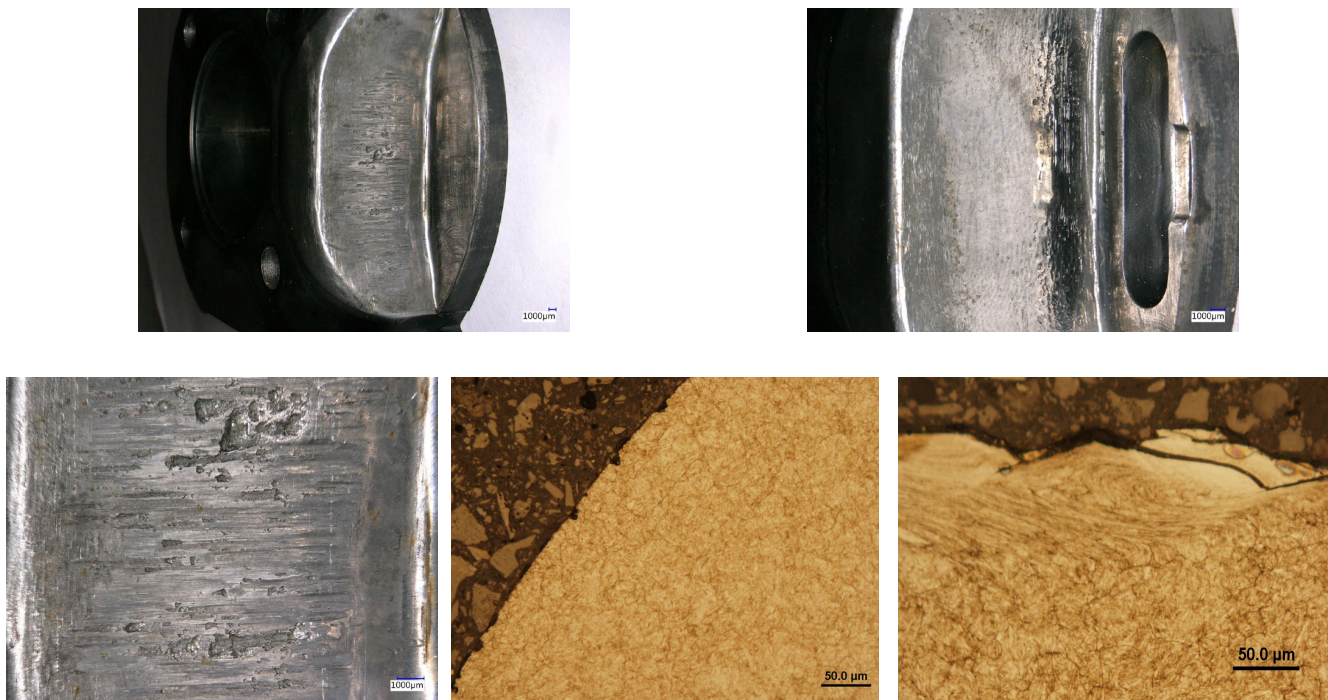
Mechanical wear of the shaped part of the mould and the movable core.
